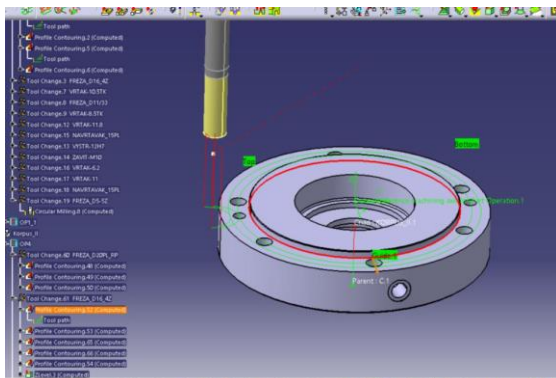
Outside milling contour and inside circle pocket milling of the Body part
